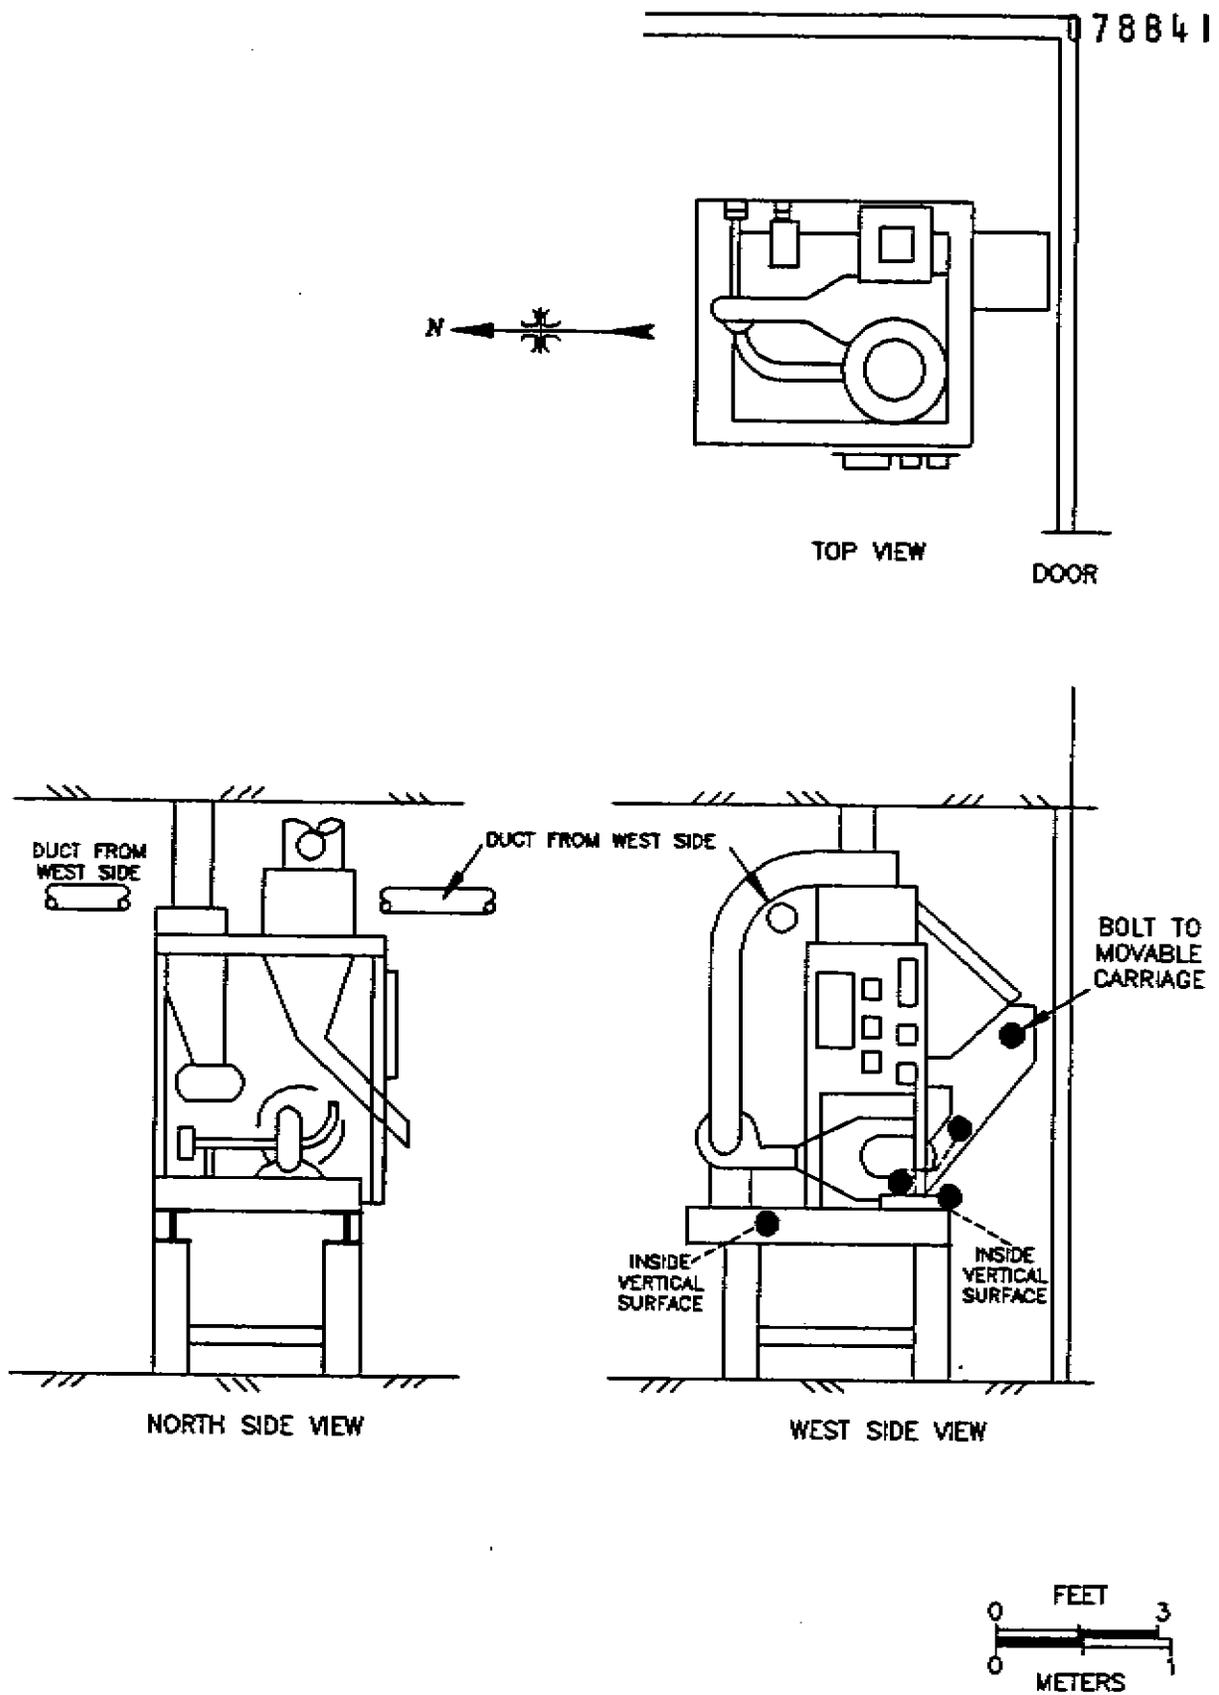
Building 23, First Floor, Crusher Room, Conical Mill #38562, Indicating Measurement Locations
